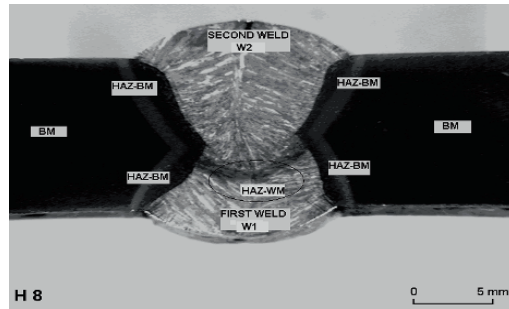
Macrostructure of double sided welded joint of line pipes
